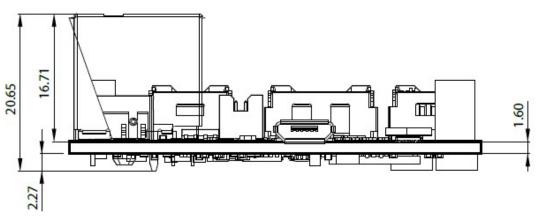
MicroMACS6 (001794) – dimensional drawing [mm]
